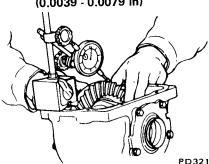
Measuring Backlash of Ring Gear and Pinion
